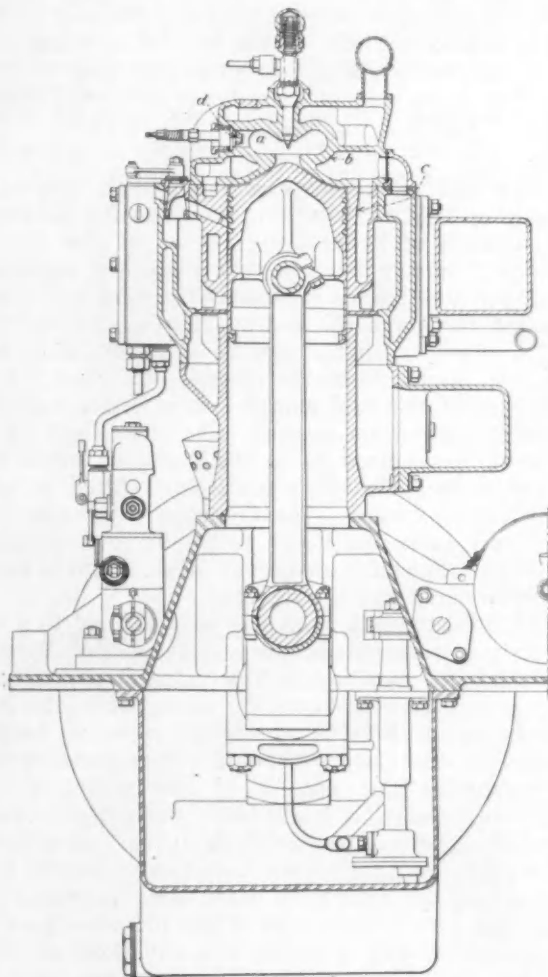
CROSS-SECTION OF THE PEUGEOT HEAVY-OIL ENGINE
